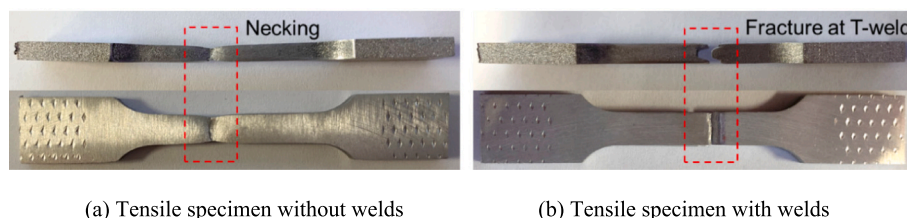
Tested tensile specimens with/without welds showing the fracture.
